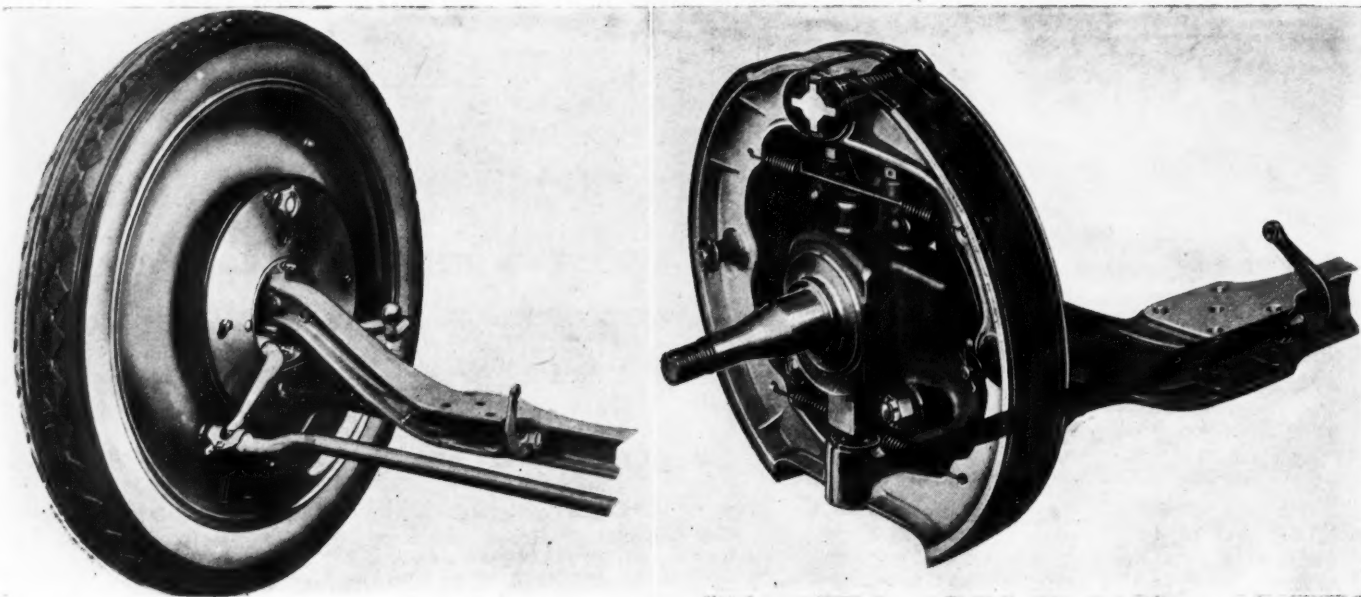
Two views of Rickenbacker front wheel brake showing adjusting wedge at anchorage, phantom of rhomboid, cam, etc.
